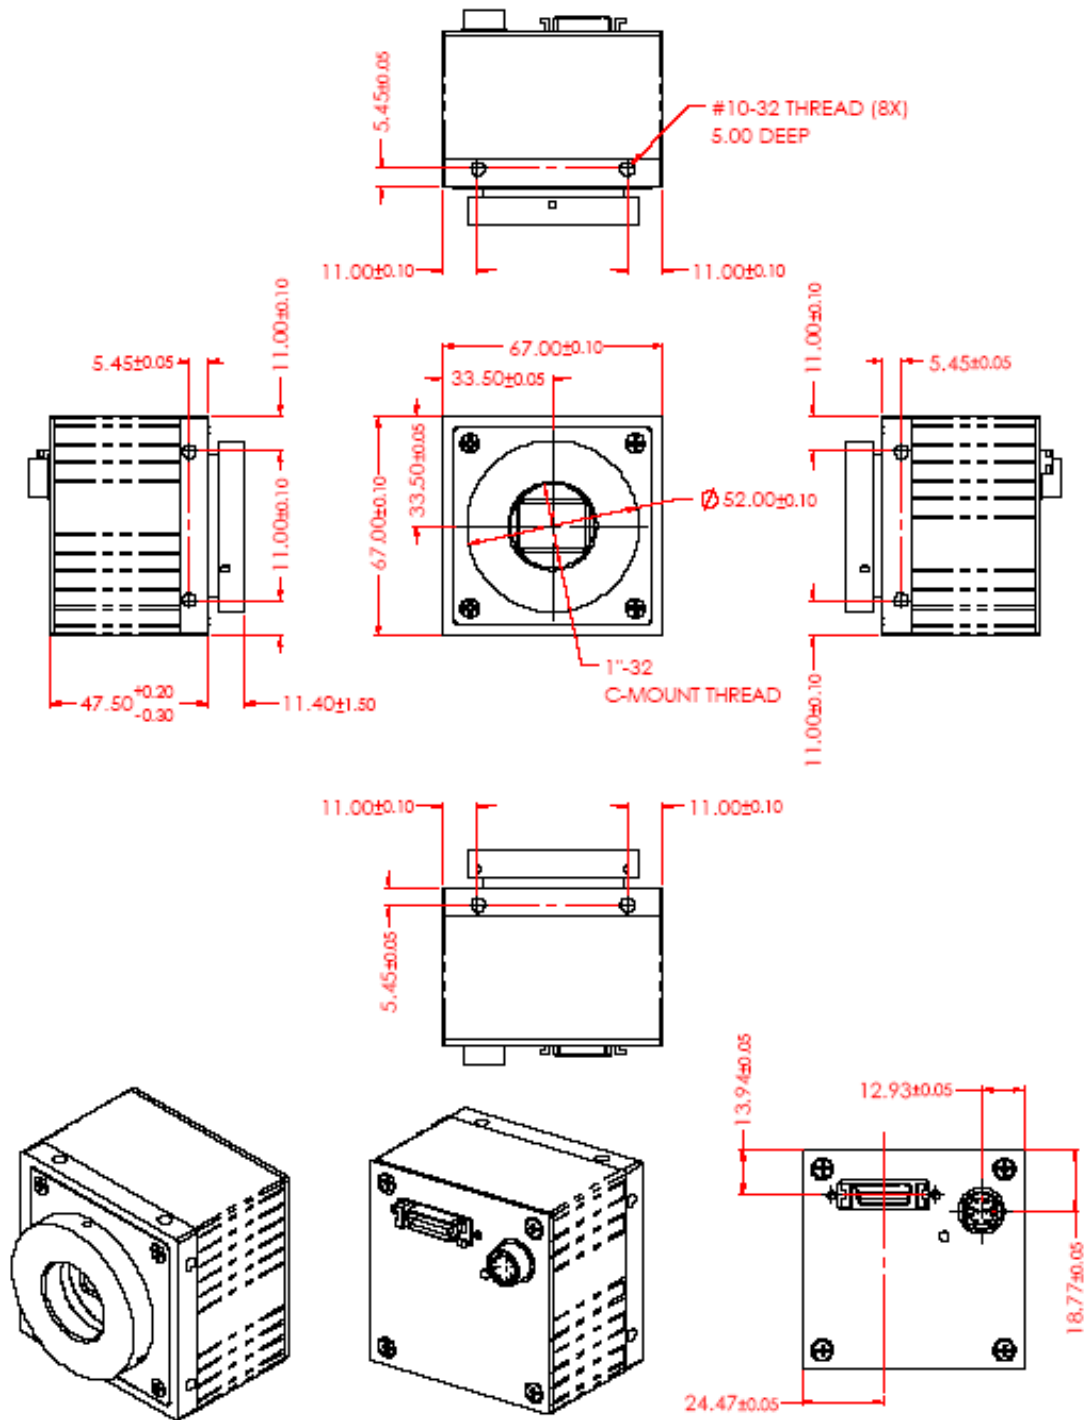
IPX-2M30-L and IPX-2M30H-L Dimensional Drawings
